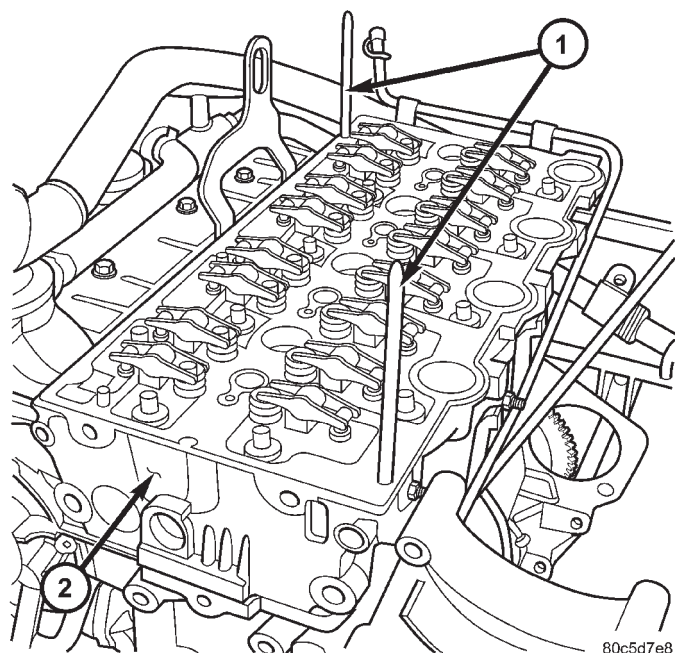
CYLINDER HEAD COVER/INTAKE MANIFOLD ALIGNMENT STUDS VM.1066
